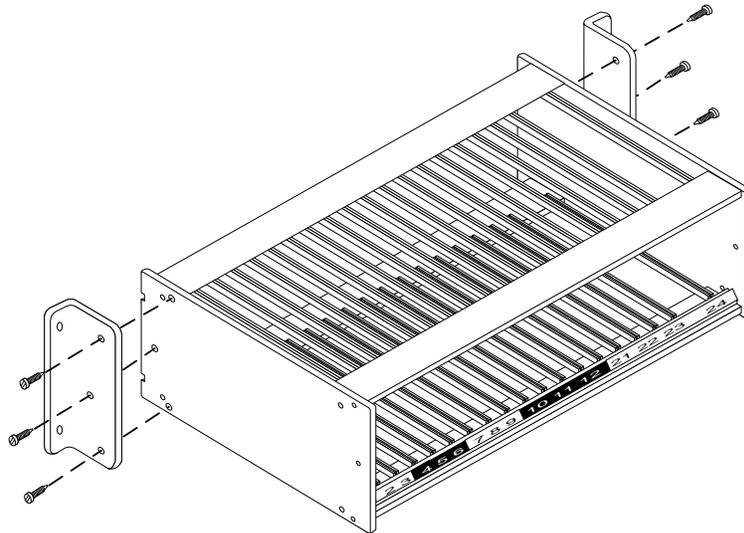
AC 120 Chassis with Rear-Position Mounted Brackets
